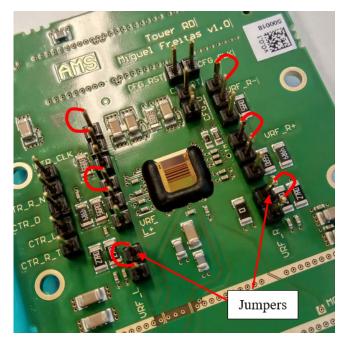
PCB board with pin-headers ready for external references generation and usage through the external connection with jumpers.
